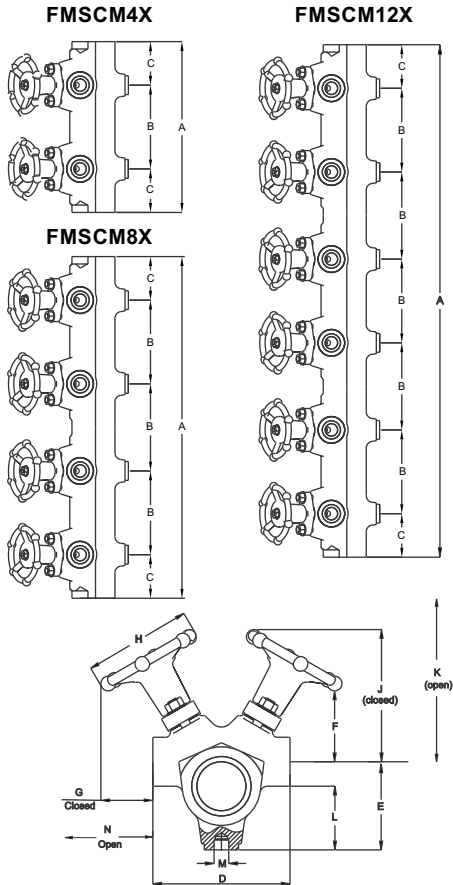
Dimension drawing of FMSCM4X, FMSCM8X, FMSCM12X
